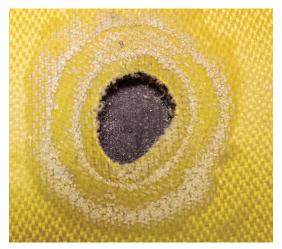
Step sanding is when each layer is sanded away to show the lower layer. Look for the changes in the weave pattern.
